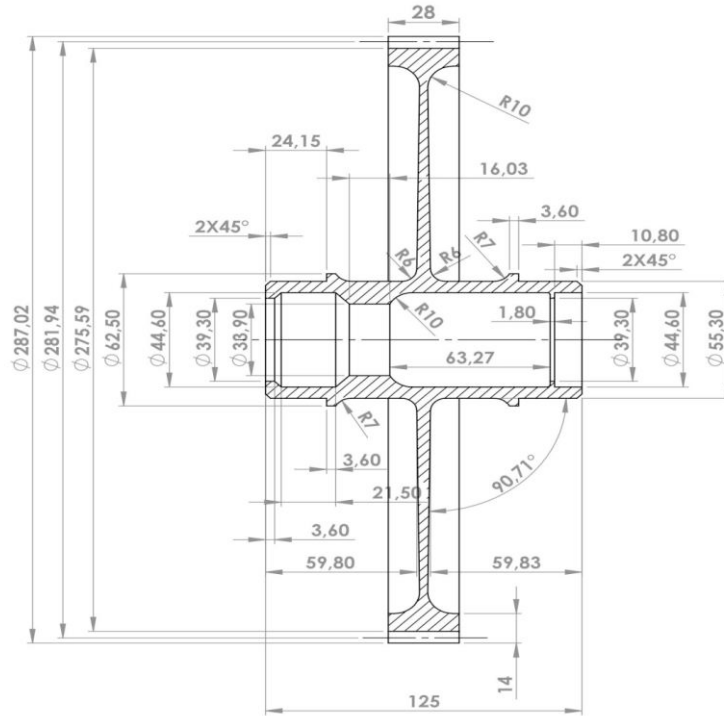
Oil Pump gear geometry (all dimensions are in mm).
